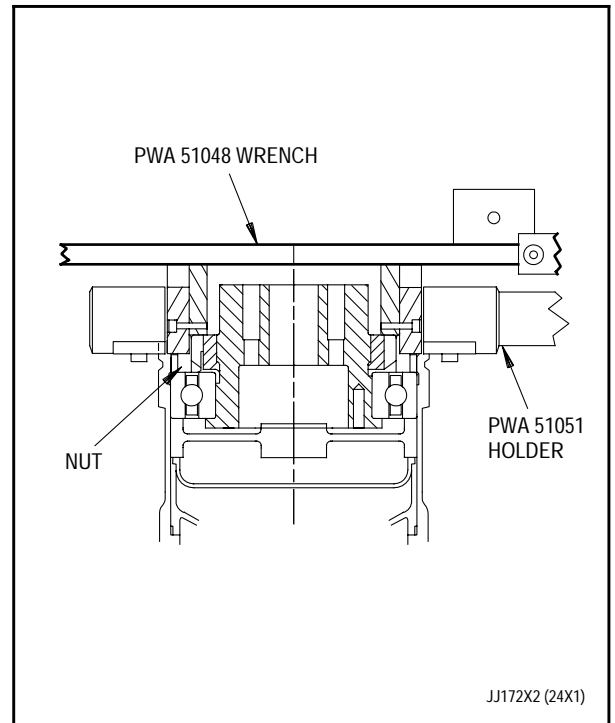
Front Compressor Drive Turbine Rotor and Stator - Installation into PWA 56338 Stand (Sheet 4 of 9)
